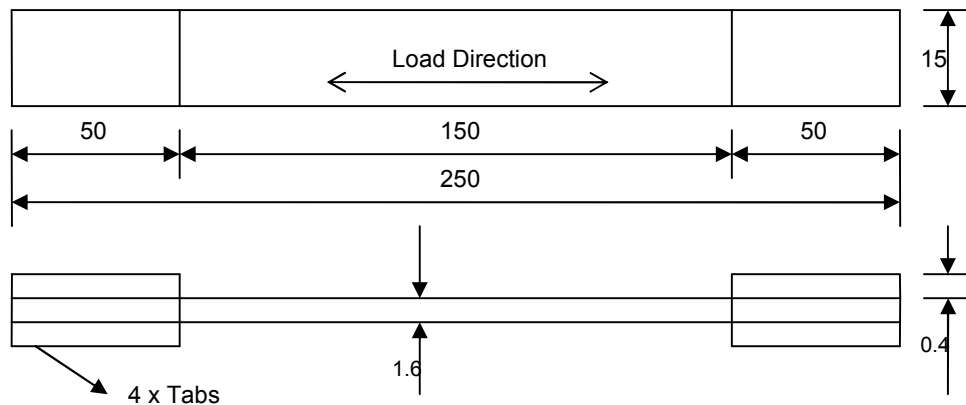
Dimensions and geometrical shape of Tensile test specimens.
